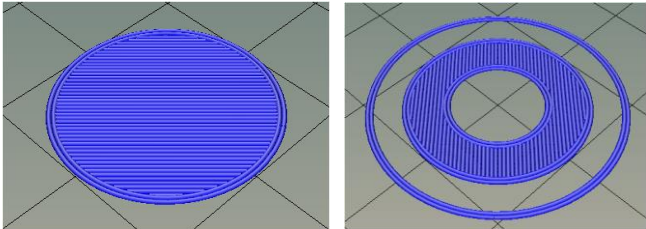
Top/bottom layers for cylindrical 3D printed part [11]
